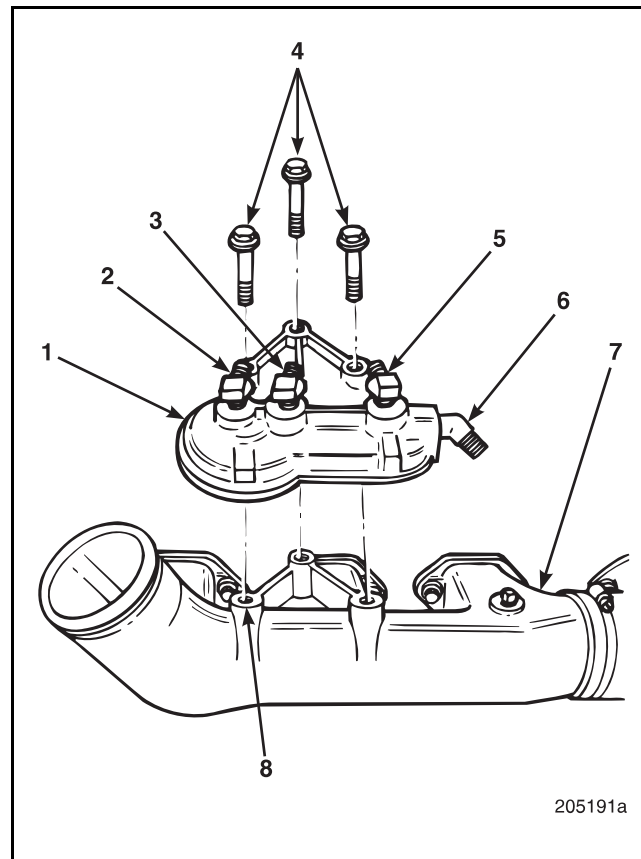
Fuel Filter Adapter Assembly Removal
